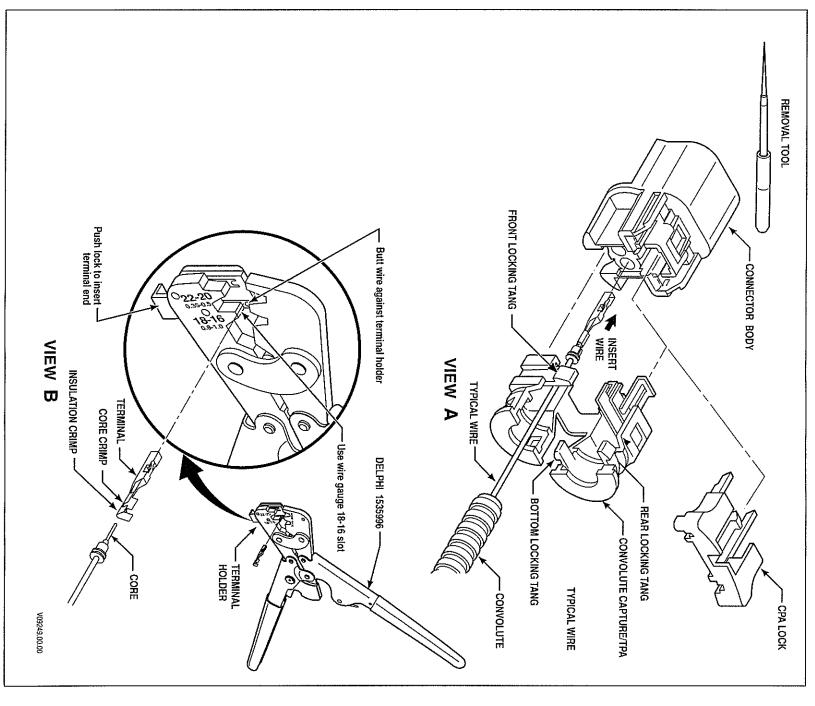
A. Delphi-Packard Metri-Pack GT150 Series Connectors—Push-to-Seat (Speed Sensor; Accumulator Solenoid; Retarder Solenoid)
